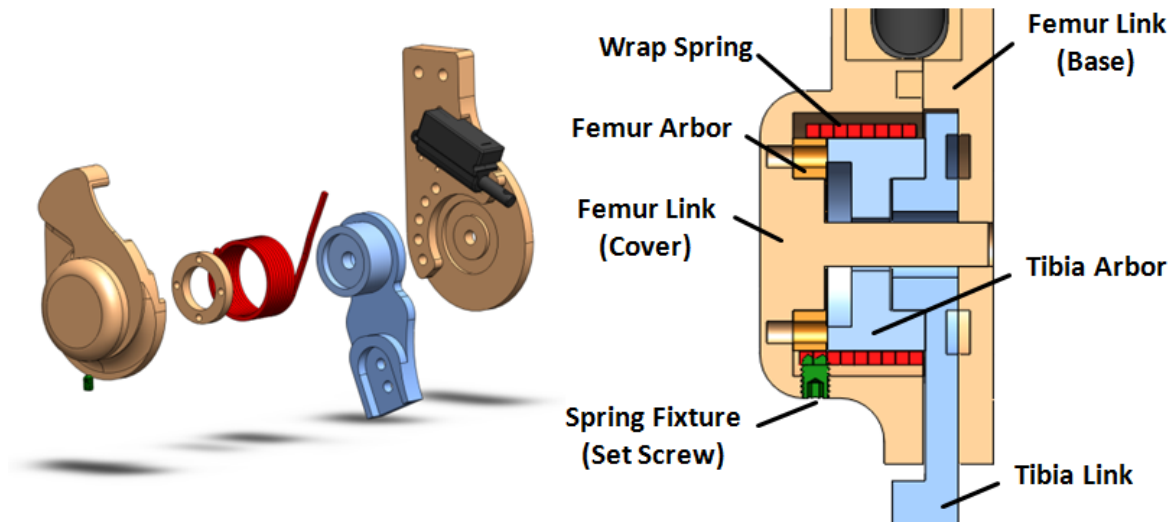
Wrap Spring Knee – First Revision. Assembly and Section View
